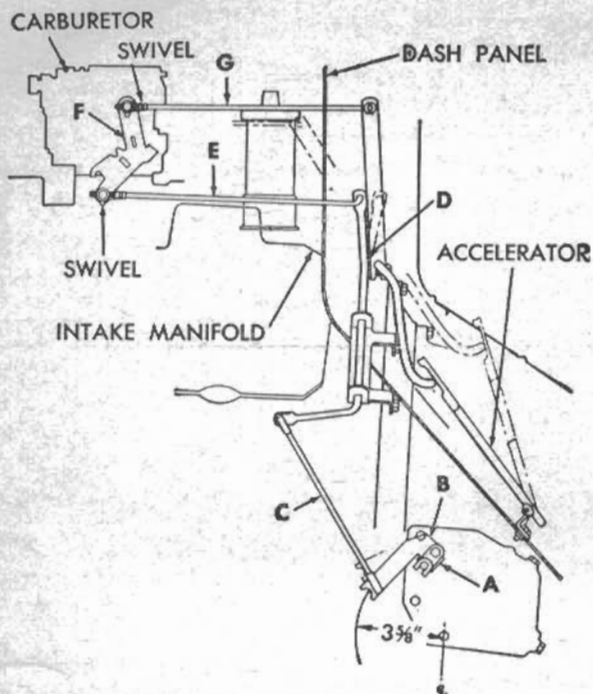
Throttle linkage adjustment. 1957 V8 Powerglide
